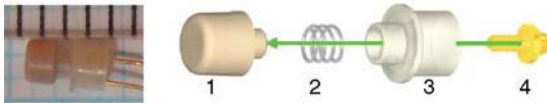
Schematic view of push button parts: 1 – knob, 2 – spring, 3 – holder and 4 – screw. Scale on left picture in mm.
